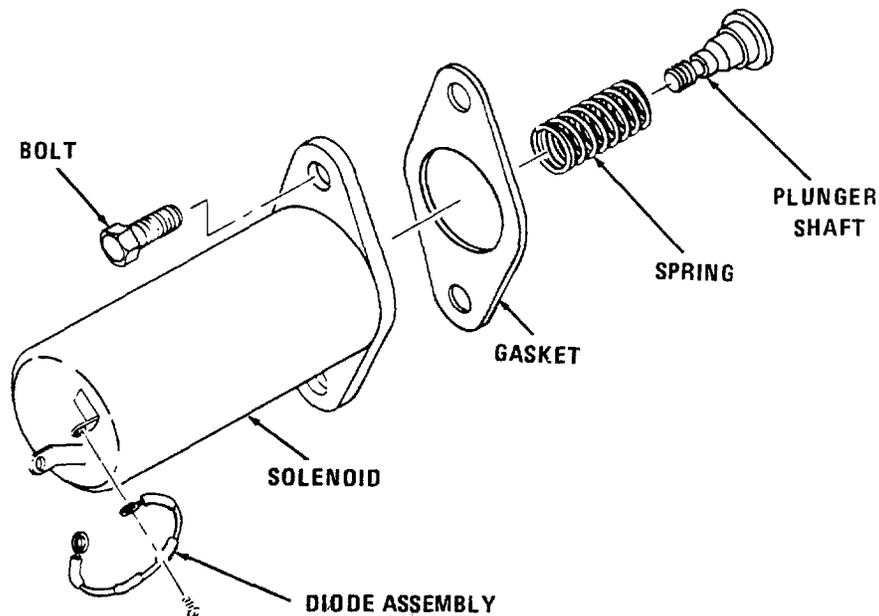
Fuel Shutdown Solenoid L1, Exploded View
